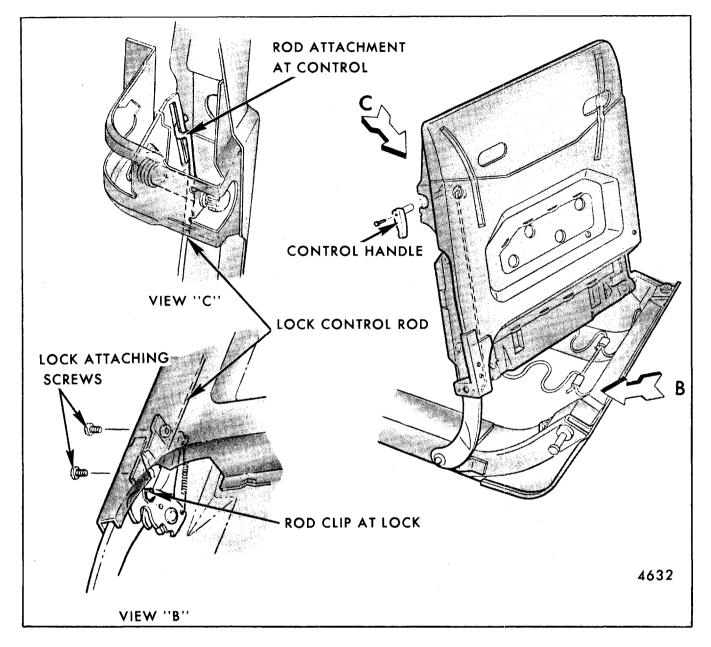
Front Seat Back Manually Operated Lock - Oldsmobile E Body Styles with Full Width or 60-40 Seats and Chevrolet Monte Carlo with 50-50 Seats
